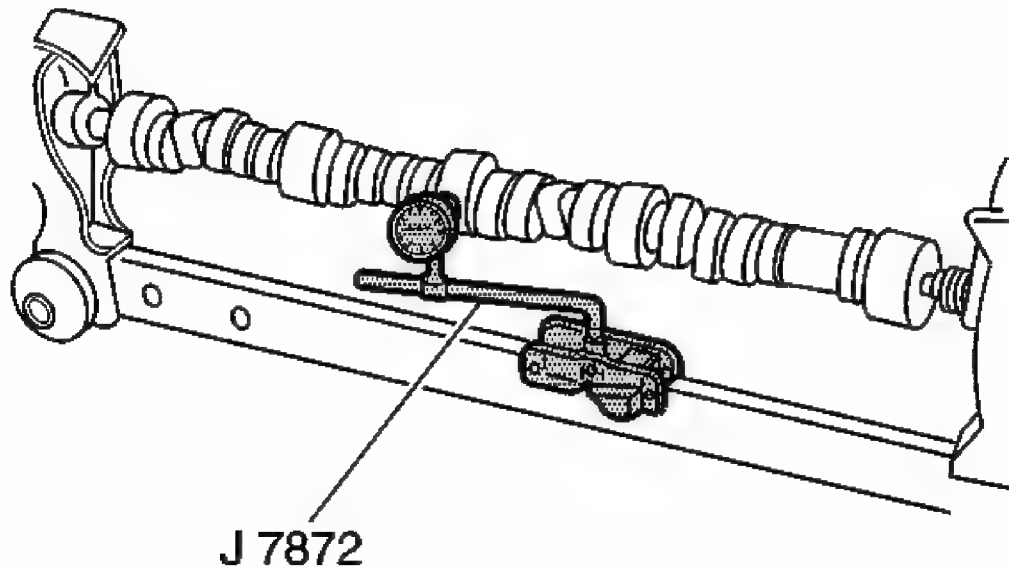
Measuring For Bent Engine Camshaft Or Excessive Engine Camshaft Runout
